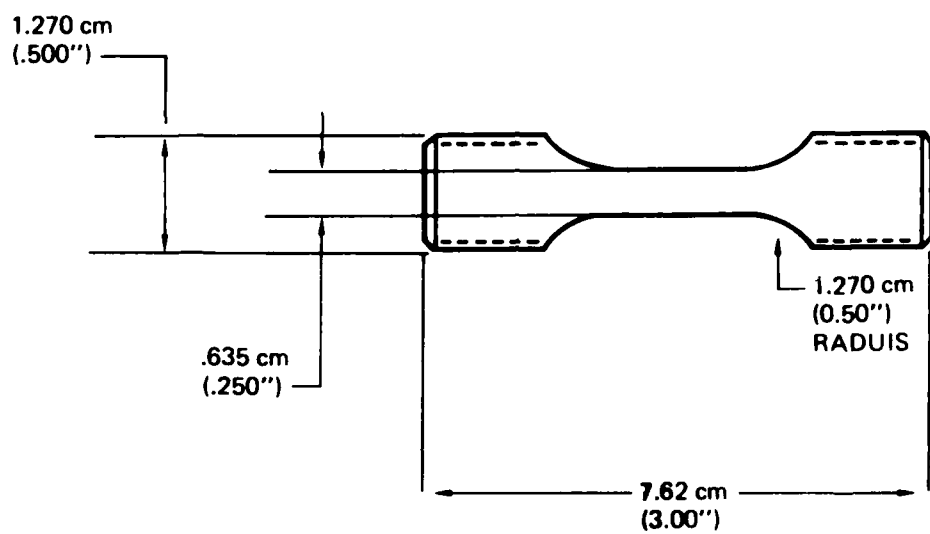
Uniform Section Smooth Bar Fatigue Specimen
